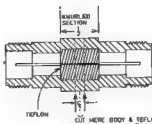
UG29B/U Type N Connector showing the position of cuts to make two end adaptors
